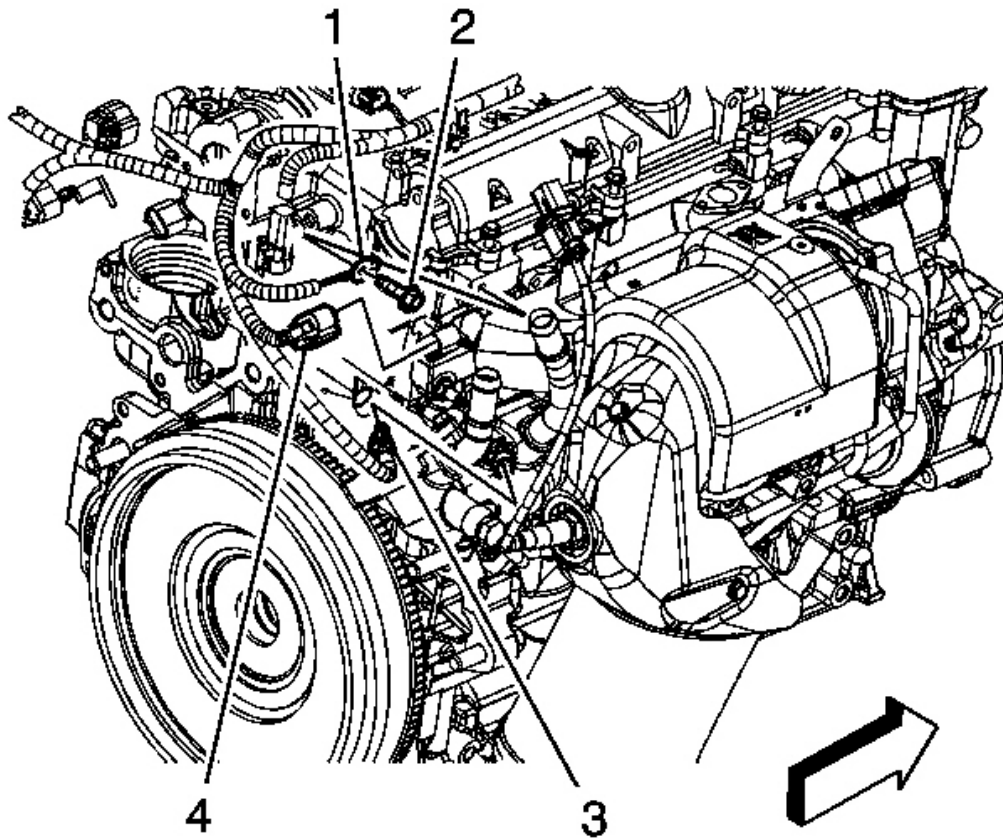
Engine Wiring Harness Electrical Connector & ECT Sensor
